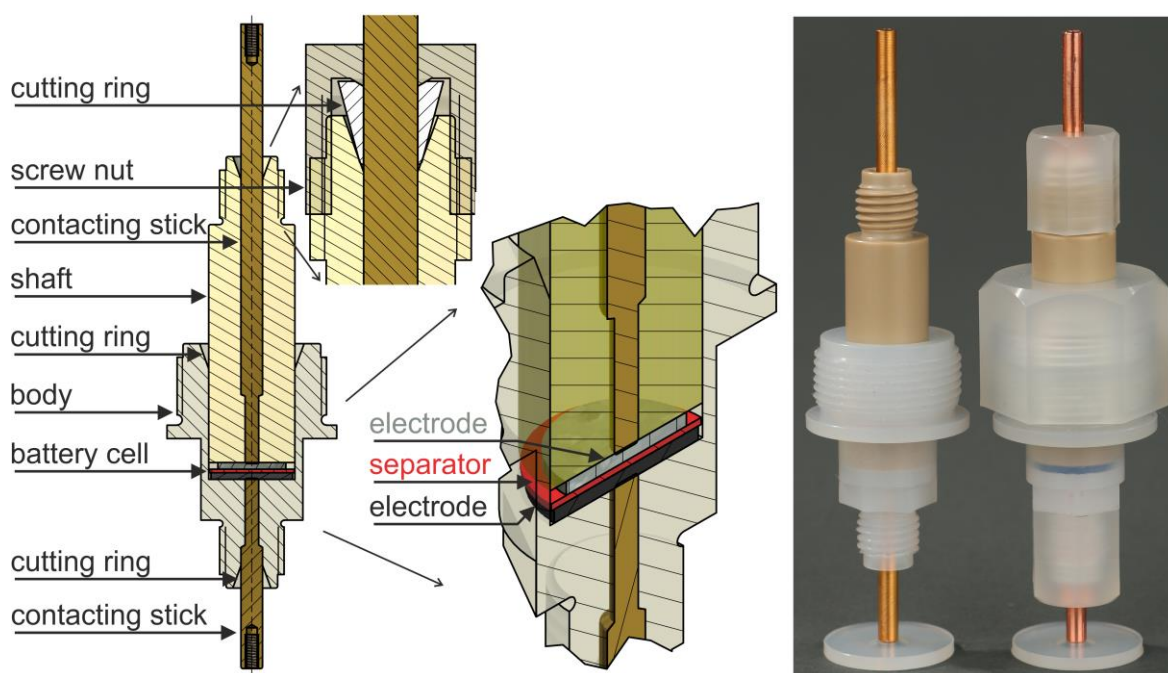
Design of *in-operando* NMR container. *Left: Sectional drawing of cell container version 3.6. Electrodes are placed in a cylindrical body, which is closed with a shaft and sealed by a cutting ring. To connect the electrodes, plastic contacting sticks with conductive coating are pushed through holes in body and shaft. The sticks are sealed by cutting rings as well. For better visibility an upper electrode (grey) with a reduced diameter was used. Right: Photograph of cell container version 3.6 with and without screw nuts and cutting rings.
